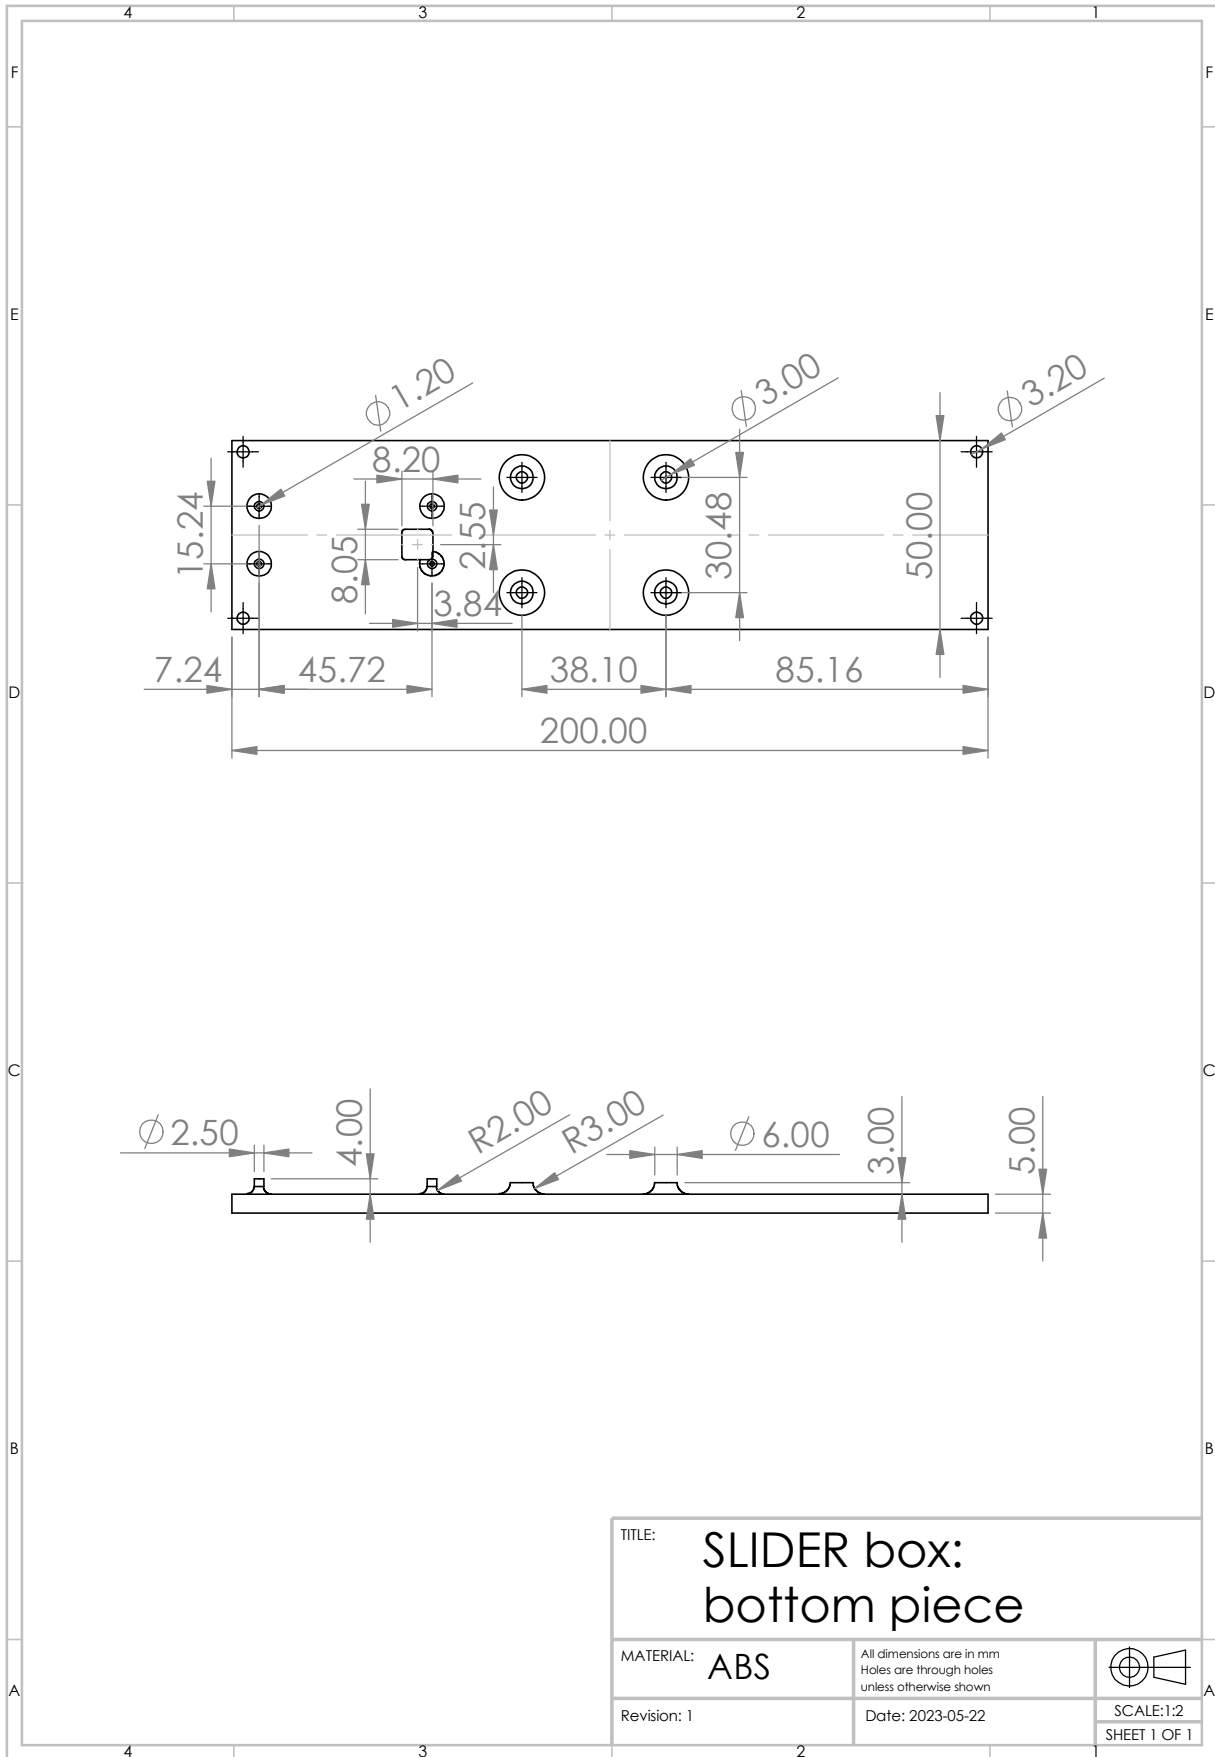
Technical drawing of the bottom piece of the SLIDER box.
